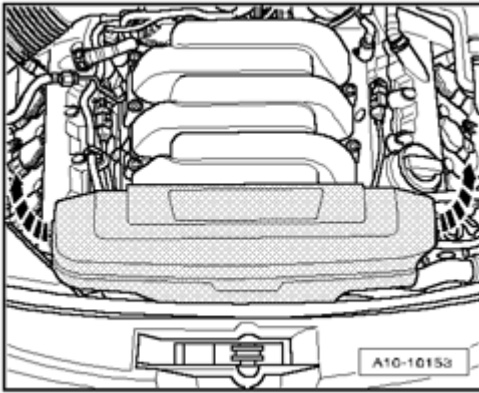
Locating Connector At Camshaft Position Sensor G40
